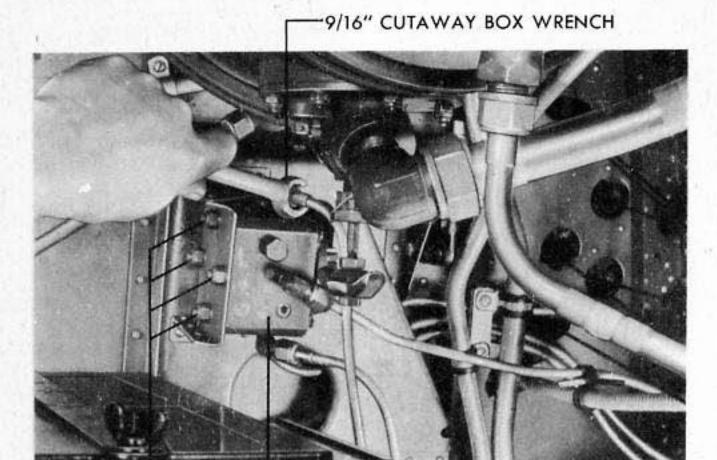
REMOVING FOUR-WAY SELECTOR VALVE
